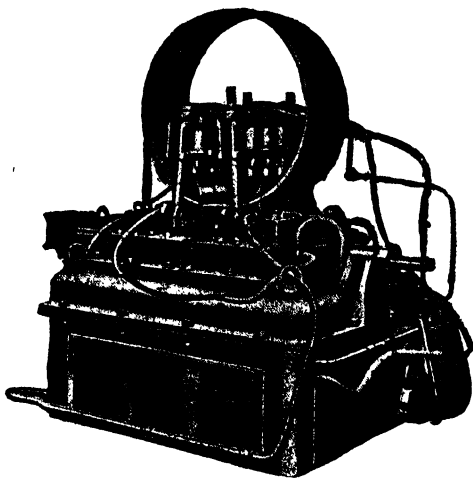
HYDRAULIC BUTT WELDER FOR HEAVY STEEL TYRES.
